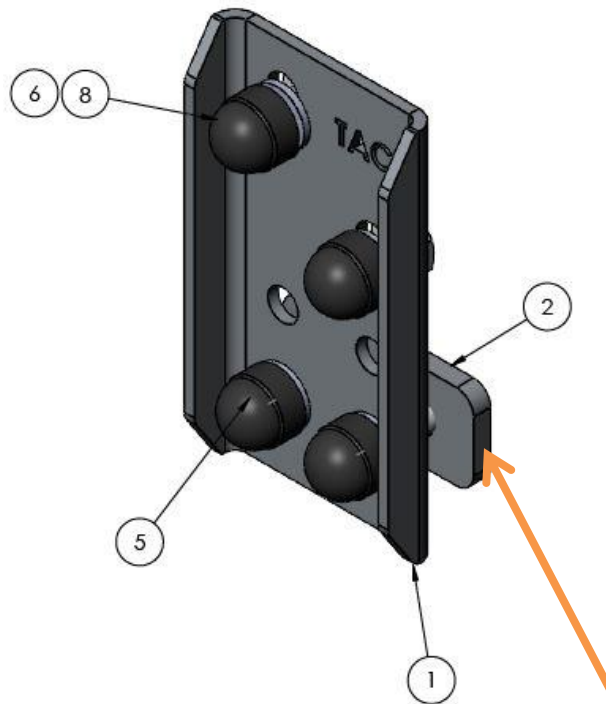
The above Plate with threaded holes is inserted into the below rail inside the Load Bin
